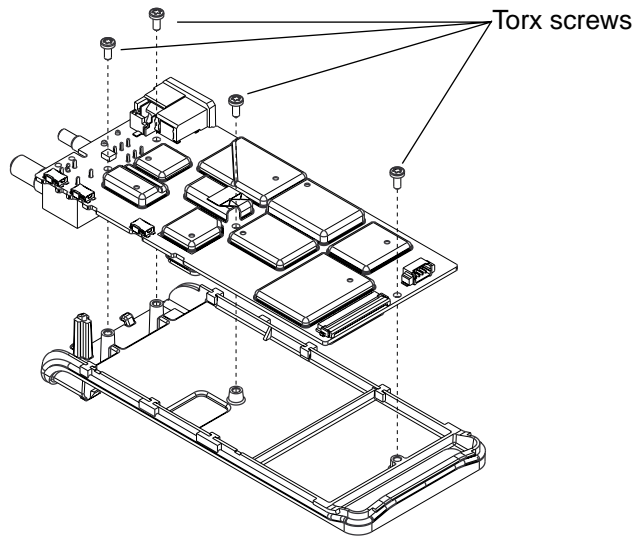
UHF/VHF Circuit Board Removal and Reinstallation
